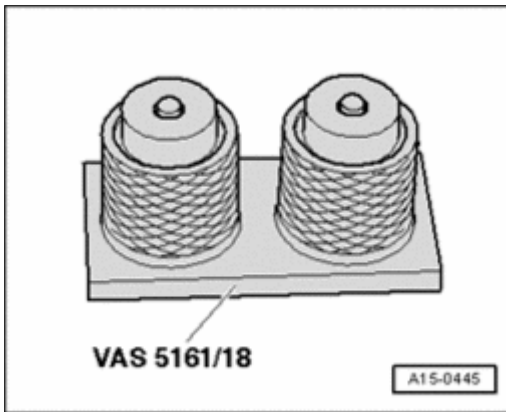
Identifying Installation Cartridge VAS 5161/8
